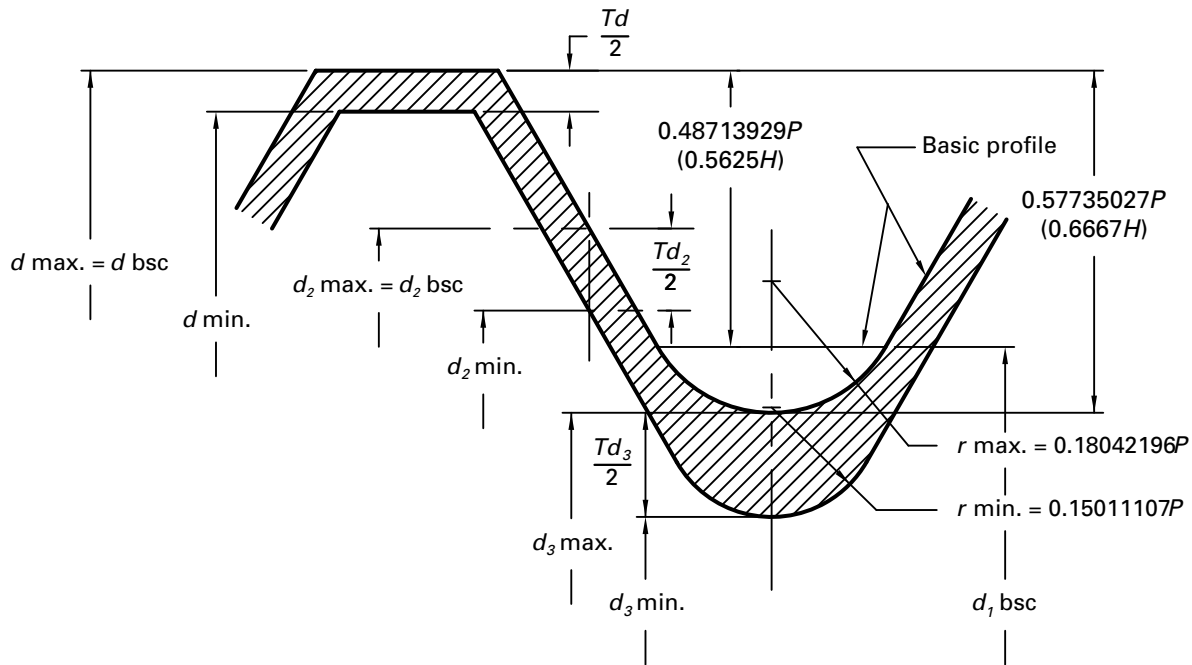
External UNJ Thread Design Profile and Tolerances
